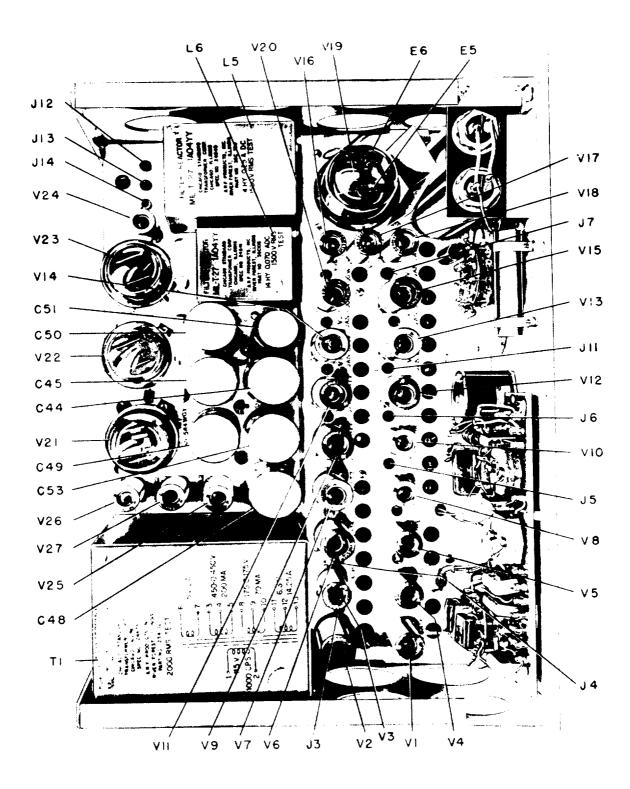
Chassis, Top View TS-592A/UPM-15 and TS-592B/UPM-15
